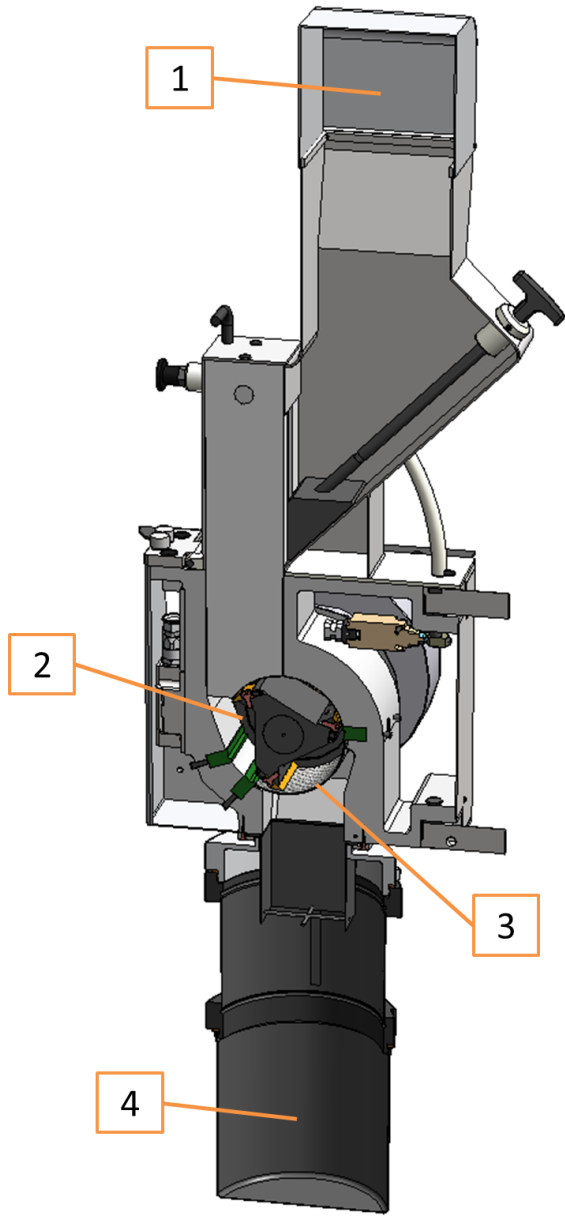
Design of a typical shredding machine: hopper (1), chamber (2), discharge grate (3), and bin (4).
